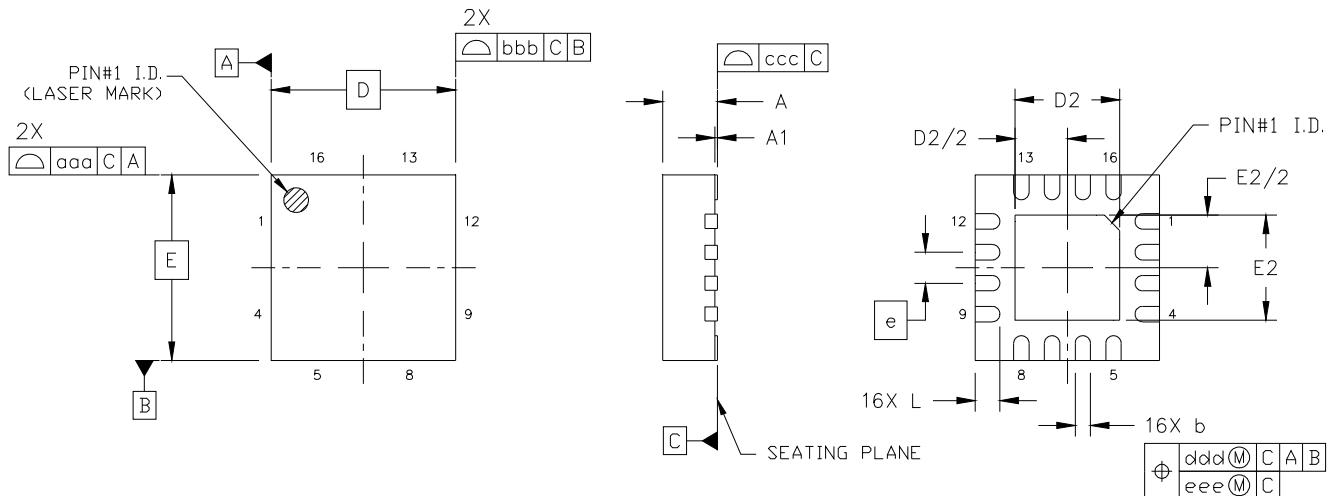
Si53306 3x3 mm 16-QFN Package Diagram
